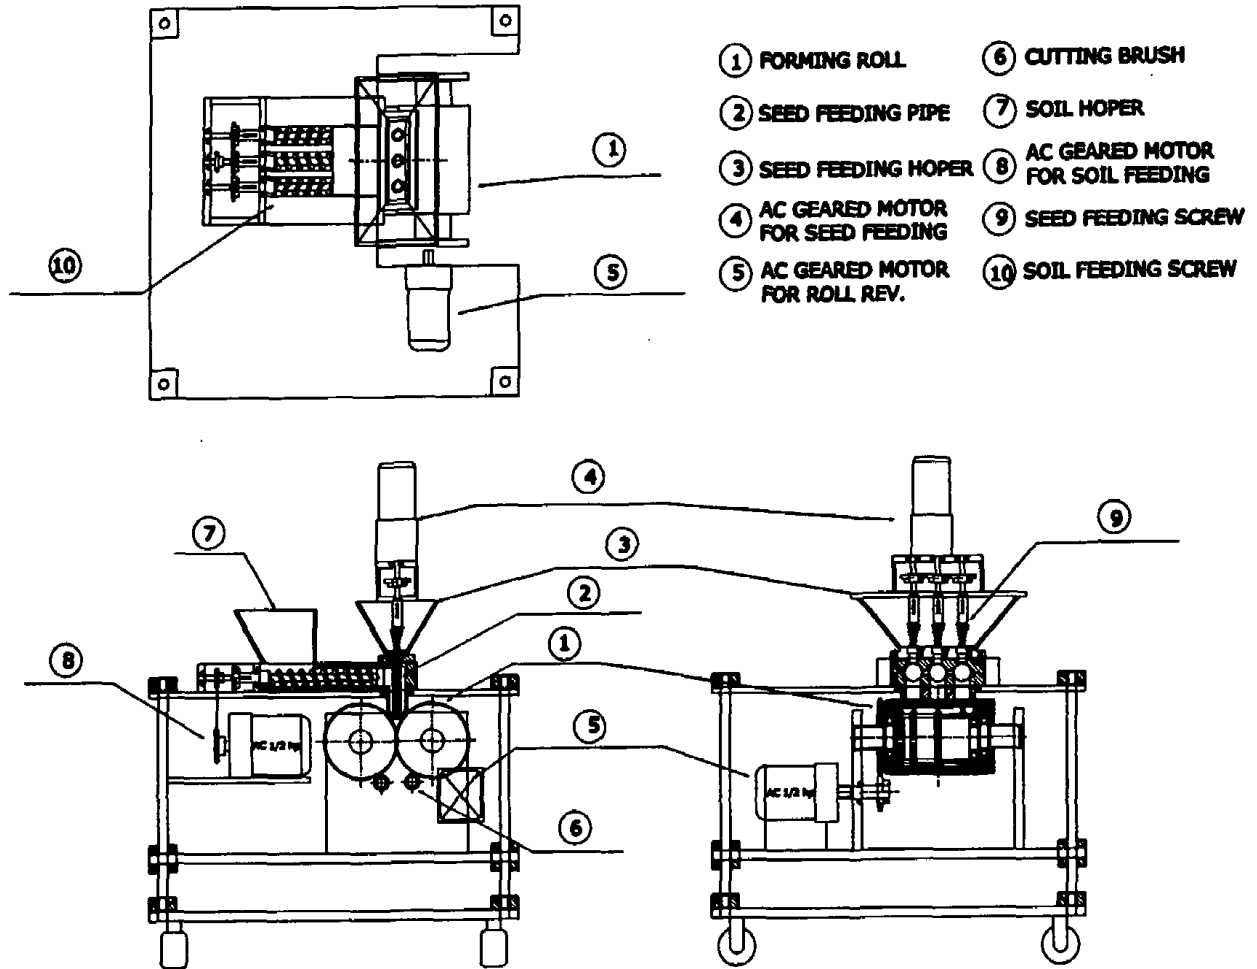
A schematic diagram of the third experimental rice seed pelleting machine
